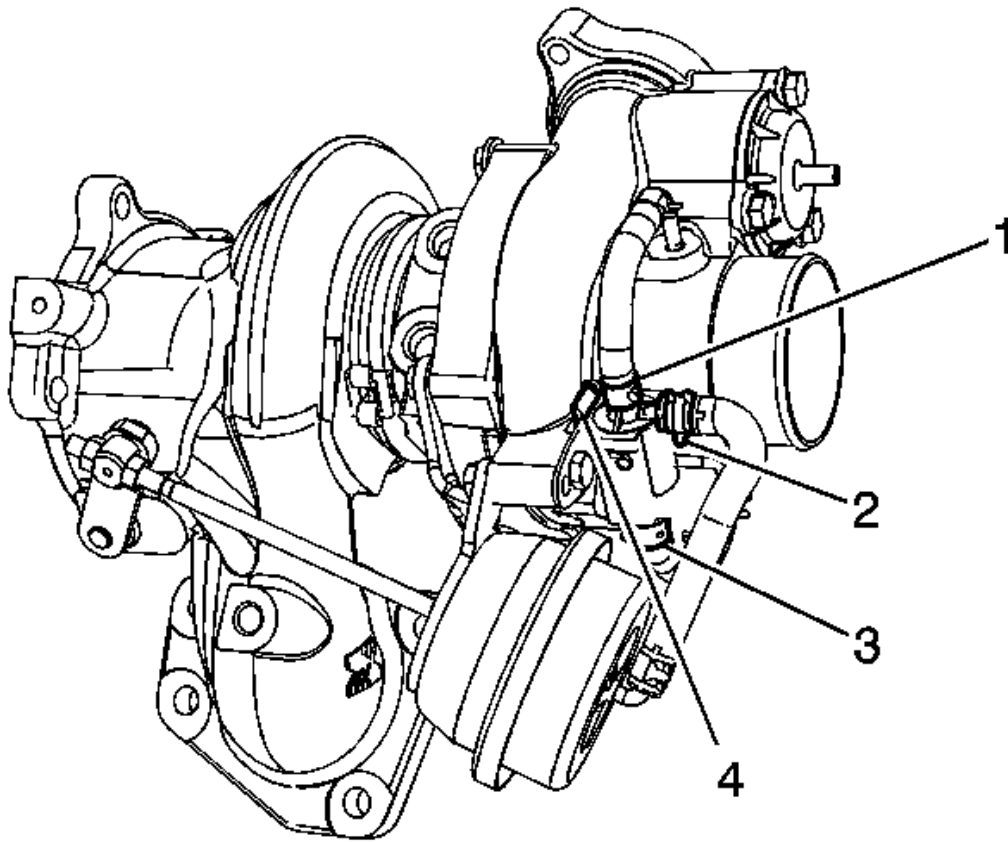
Identifying Turbocharger Wastegate Solenoid Valve Components
